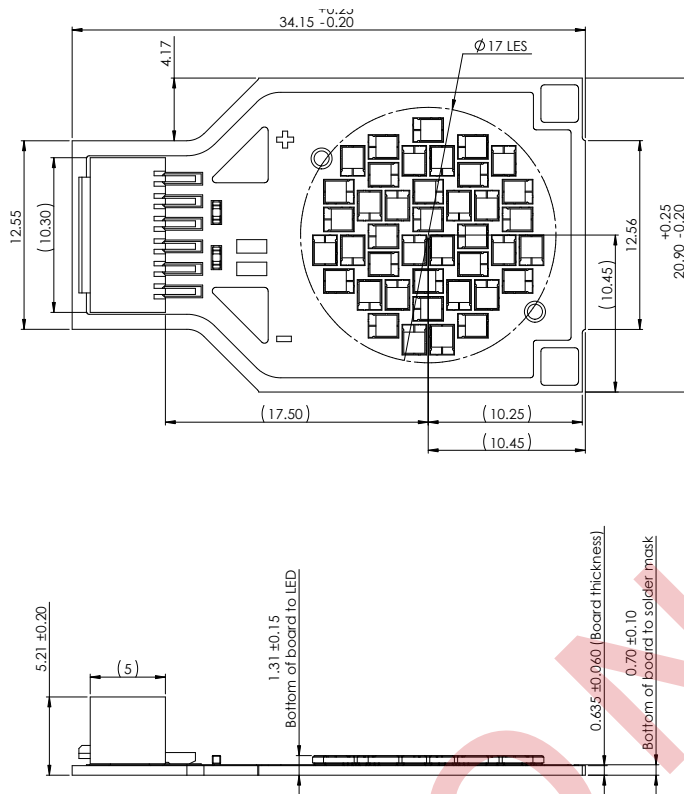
Package outline drawing for LUXEON S5000 / LXSx-Pxxx-004I.
